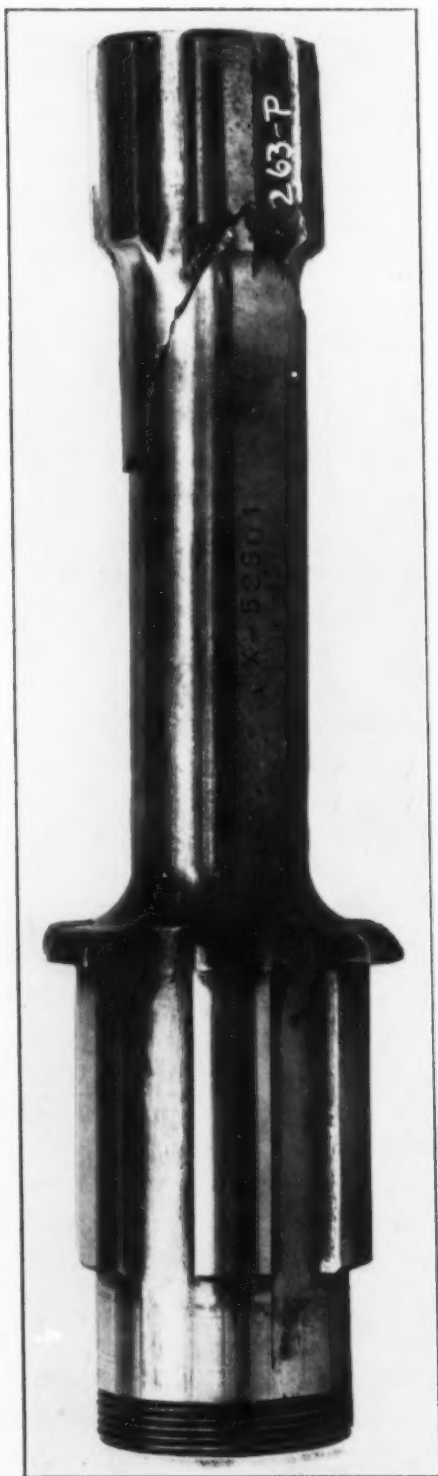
Photograph of Supercharger Drive Shaft Showing Failure. (Slightly Reduced.)
